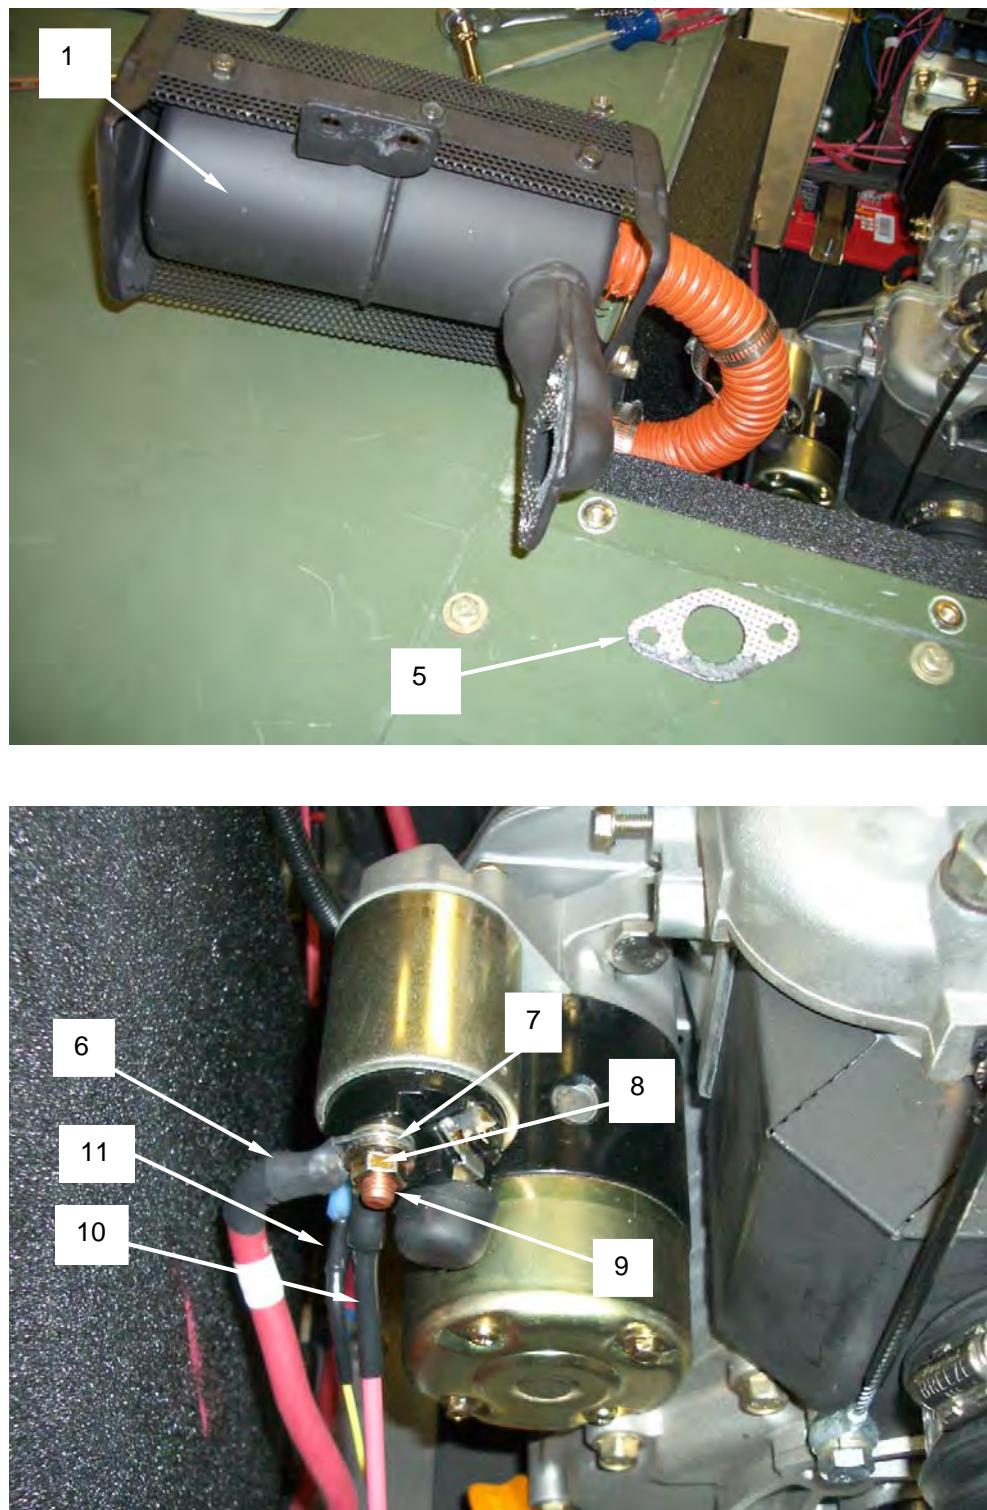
Remove, Service, Inspect, and Install Diesel Engine Electric Starter (Sheet 2 of 3).
